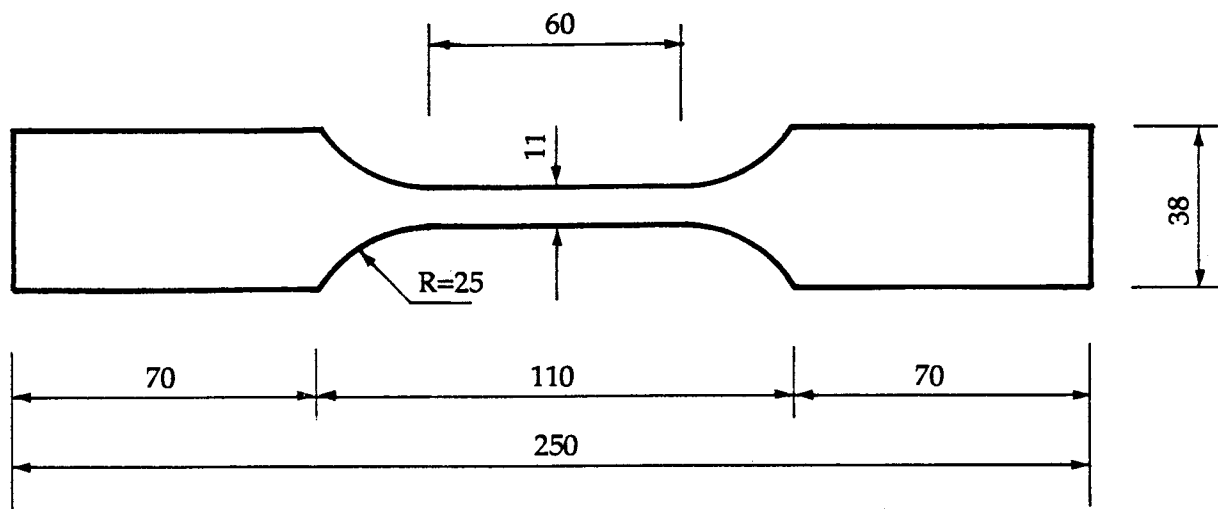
DIMENSIONS OF TENSILE TEST PIECES (mm)
